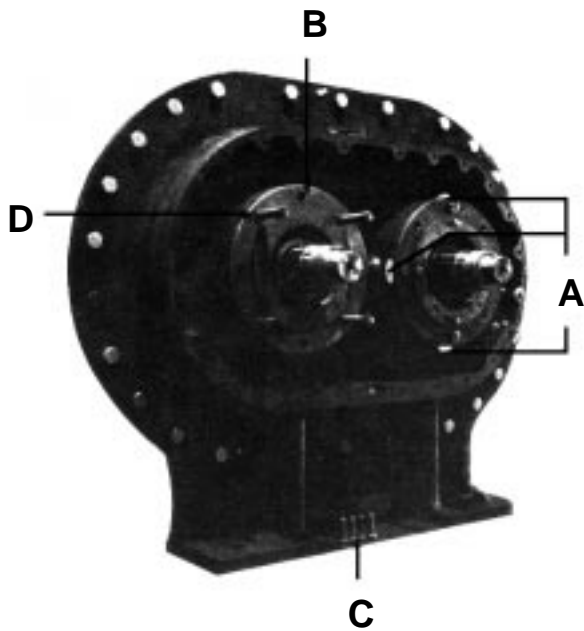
BEARING CARTRIDGE REMOVAL
